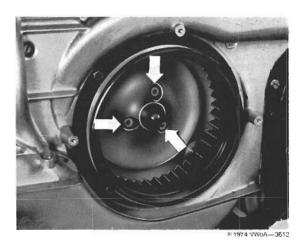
Socket head screws (arrows) that hold the fan with crankshaft pulley on engines that do not have an air pump.
